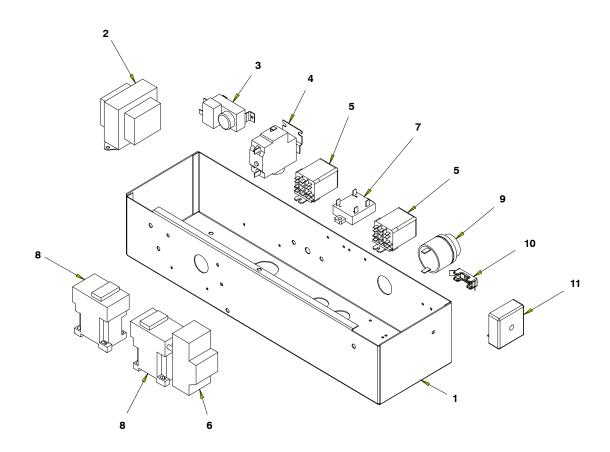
ELECTRICAL BOX ASS'Y EXPLODED VIEW
